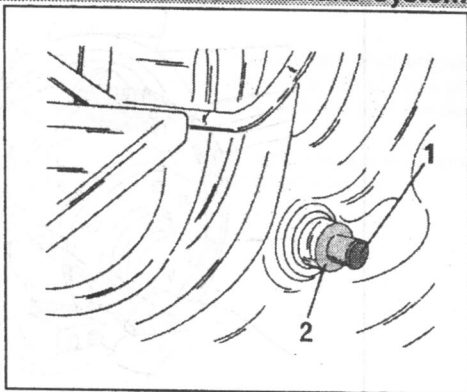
Removal of a sticking brake drum. Push the plunger (1) towards the inside and pull the plastic part (2) towards the outside. The handbrake lever must be pulled before the operation is carried out.
